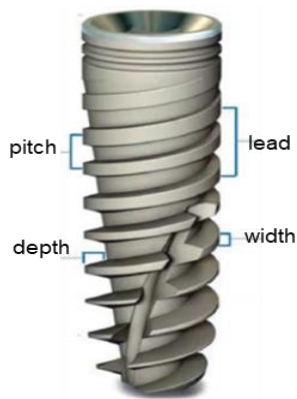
Geometric implant thread parameters. Adapted from [33].
